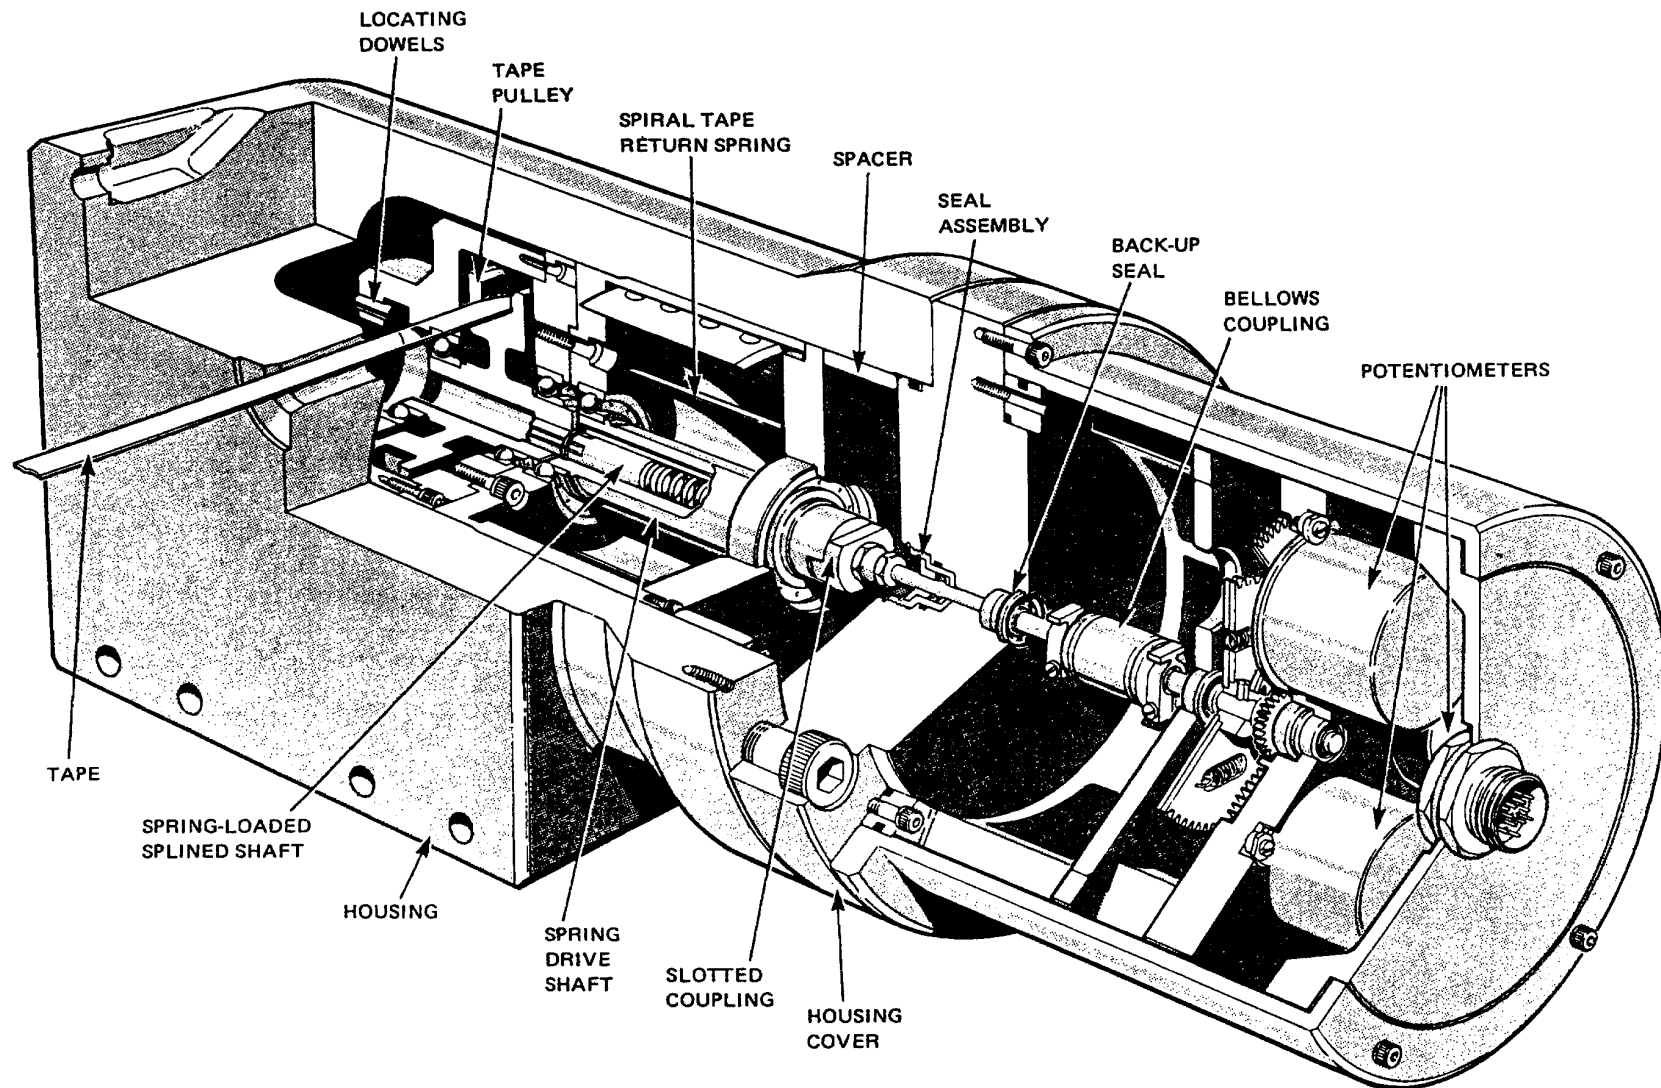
Fueling Machine 'C' Ram Tape Drive Assembly
